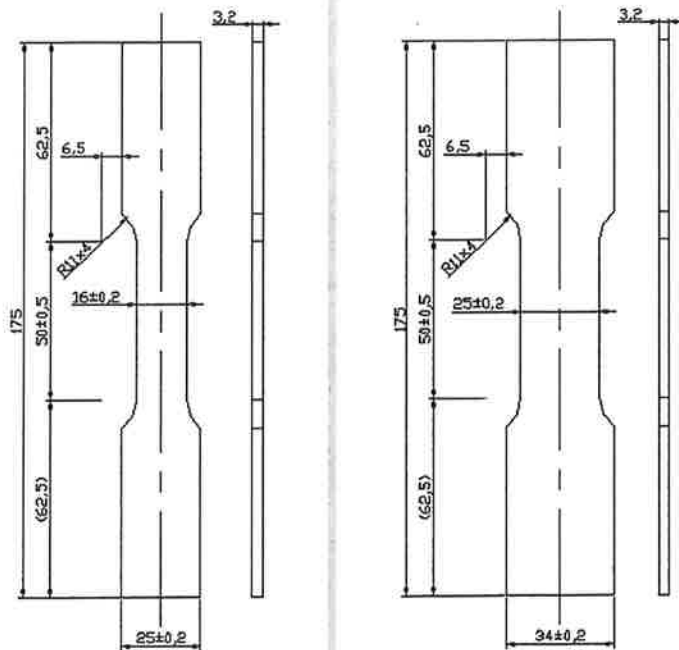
Work drawing of tensile test specimen with clued end tabs.
